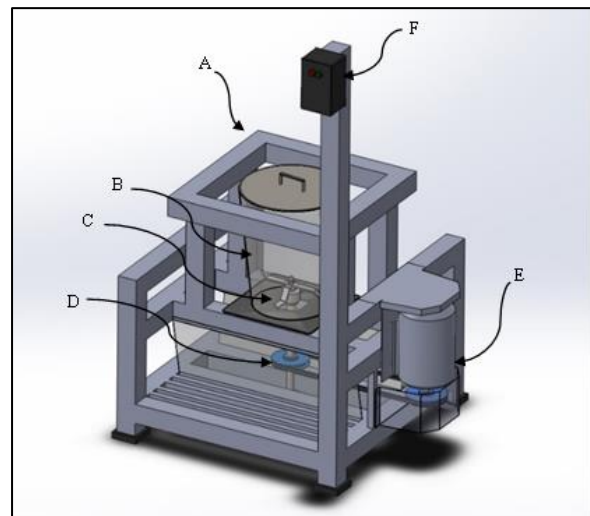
Design model of Agarwood induce inoculum mixing machine. (A) Heavy iron base, (B) Frustum-shaped stainless-steel jar, (C) Mixing blade, (D) Power transmission unit, (E) Induction motor, (F) Control panel.
